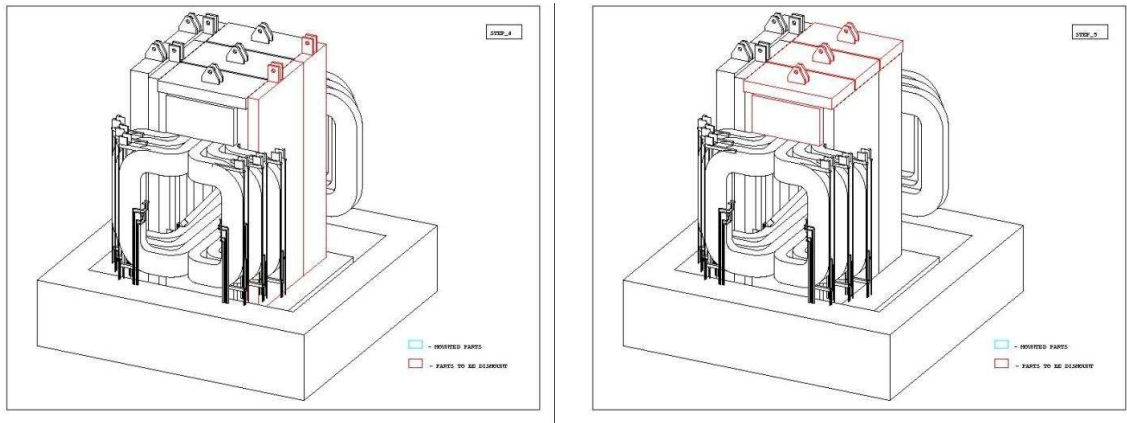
SM3 Analysis Magnet disassembly steps 5 (left) and 6 (right)
